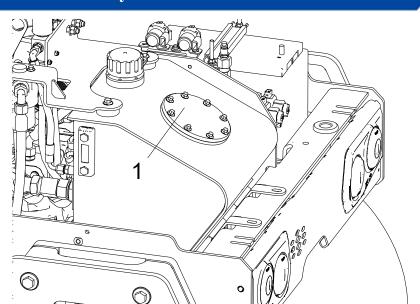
Open the check cover (1) to clean the hydraulic oil tank
